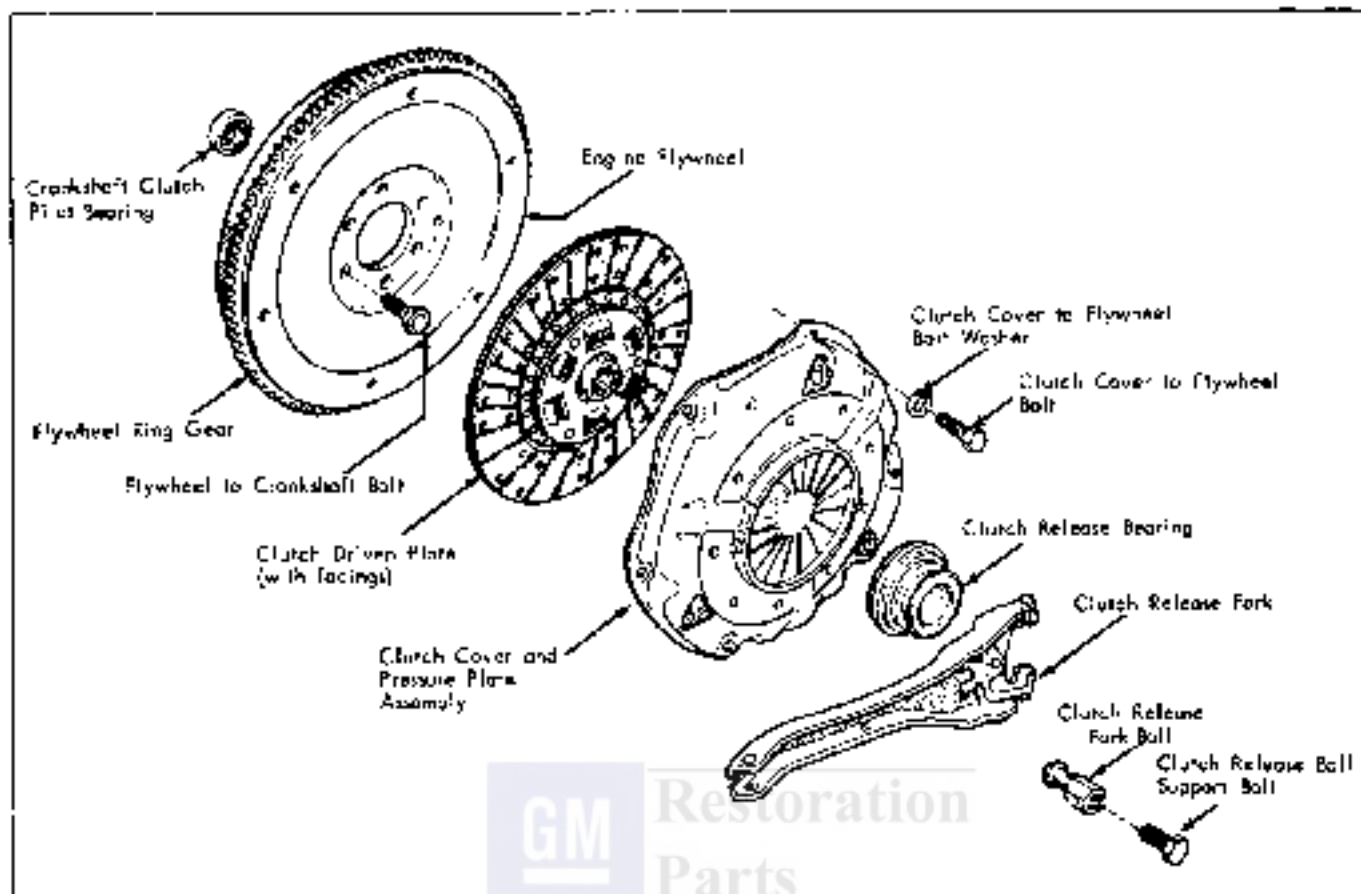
Exploded View of Clutch and Flywheel Assembly
